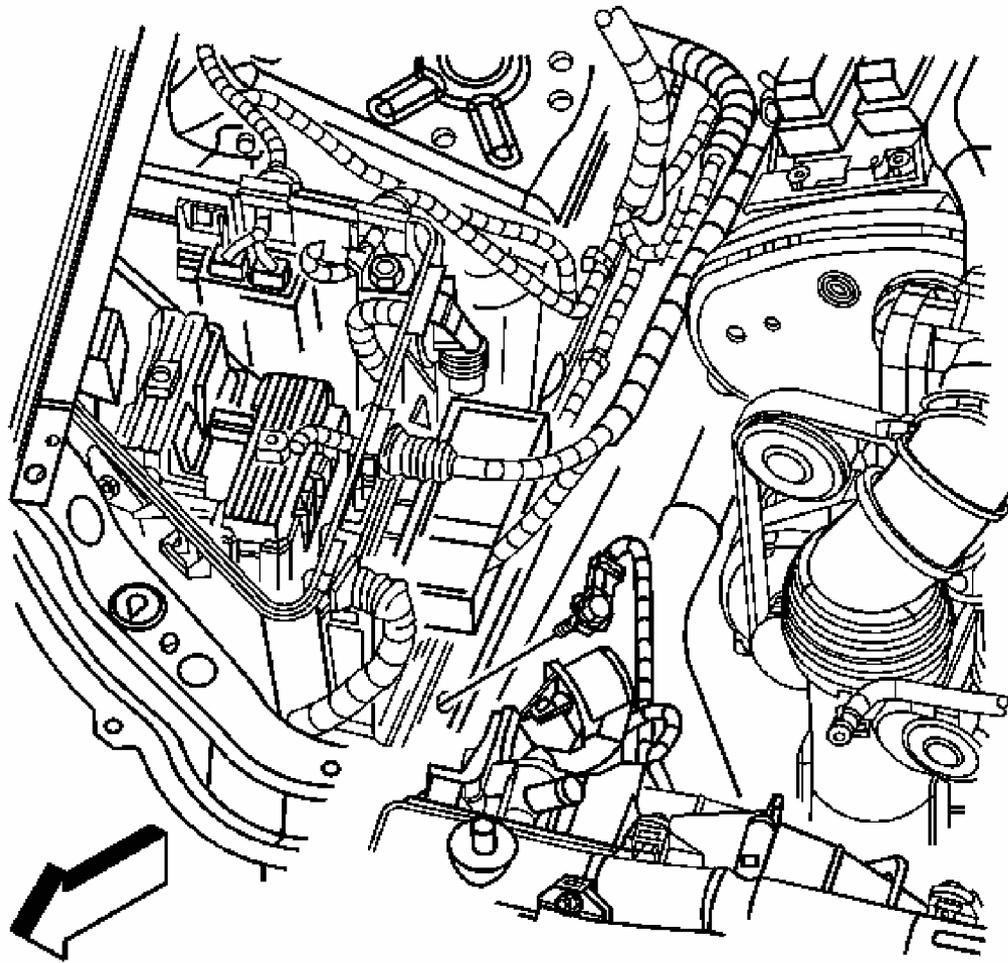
View Of Vacuum Check Valve & Brake Booster
